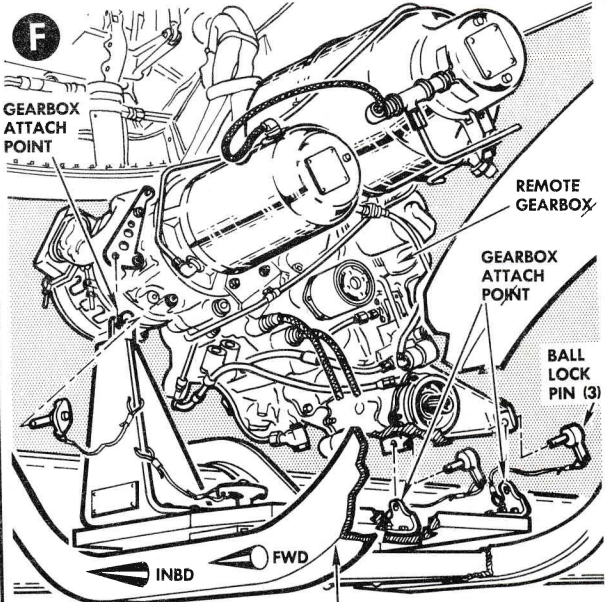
Replacement, Constant-Speed Remote Gearbox (Sheet 2 of 4)
